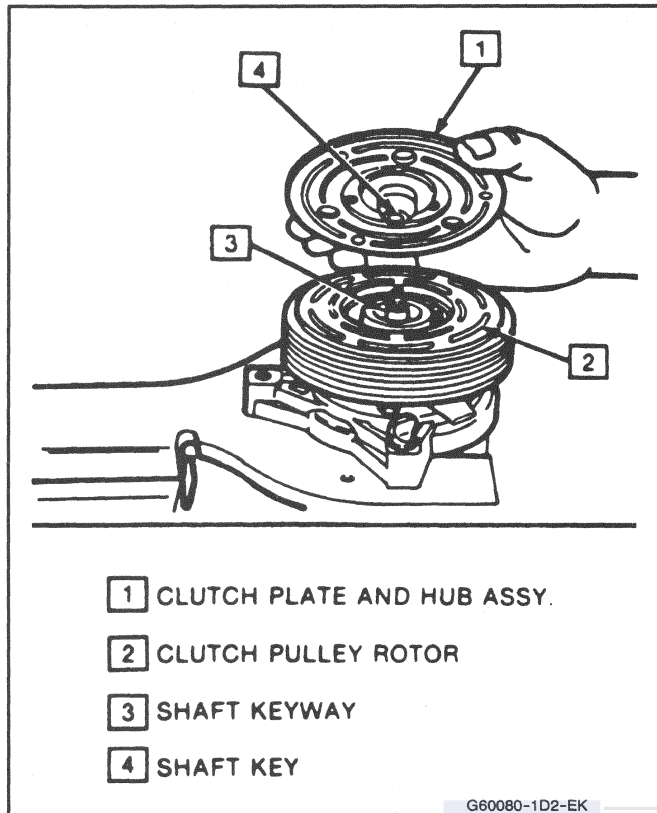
Shaft Key, Clutch Plate/Hub Installation
